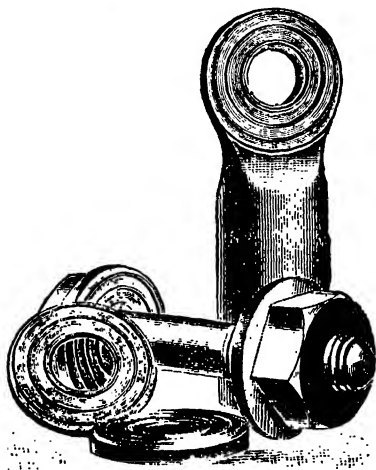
“Highfield” Connecting Bolts and Thimbles.
